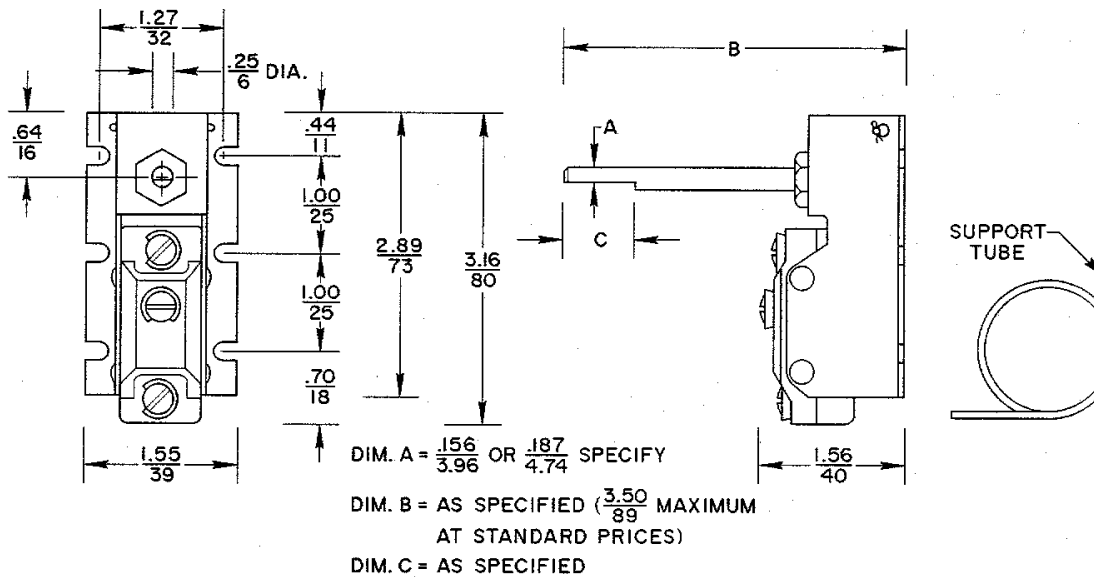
Dimension drawing showing side and front views ($\frac{1}{4}$ " [6 mm] shaft adjustment shown).
